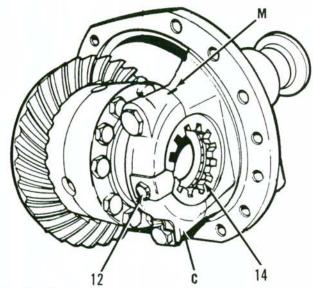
View of removed differential assembly, showing marks (M) on one of the caps (C) and housing. Mark the other cap so that caps can be quickly identified for assembly to the correct side and in the correct position.
